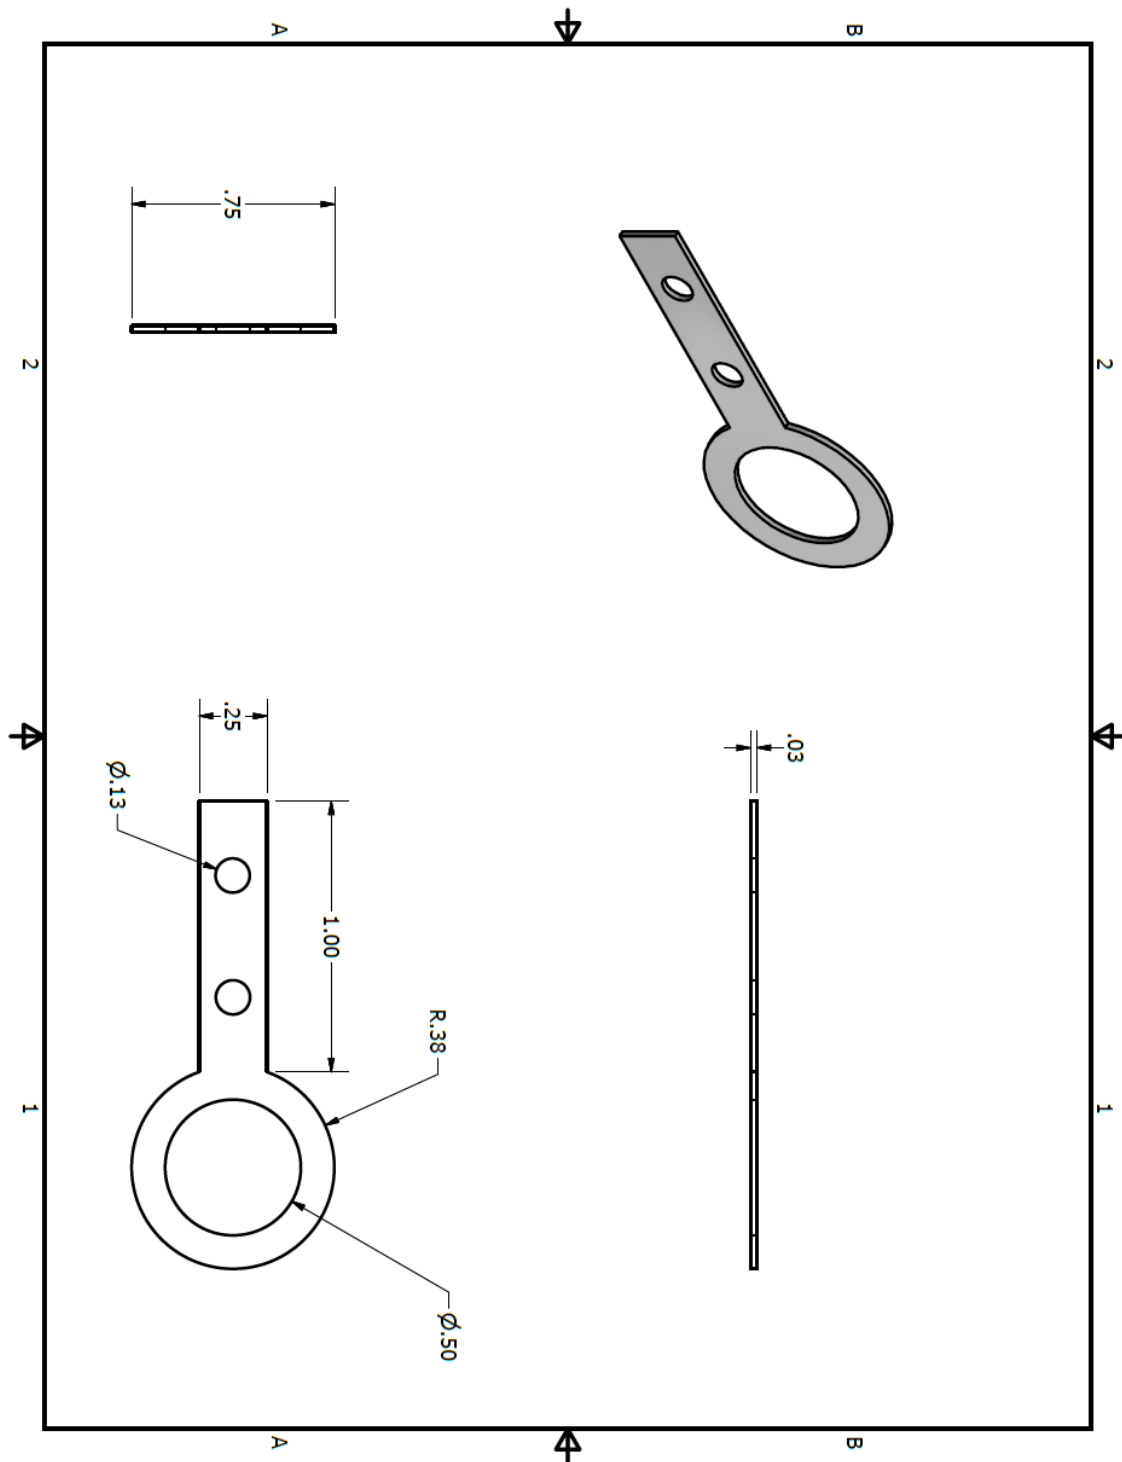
A final schematic for the elbow hinge design. This was produced using Autodesk Inventor software. It is cut out of a thin sheet of aluminum and attached to both sides of each aluminum rod.
